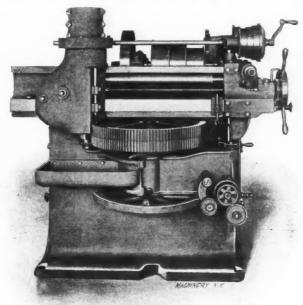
36-INCH GEAR SHAPER CUTTING TWO 24-INCH GEARS.
